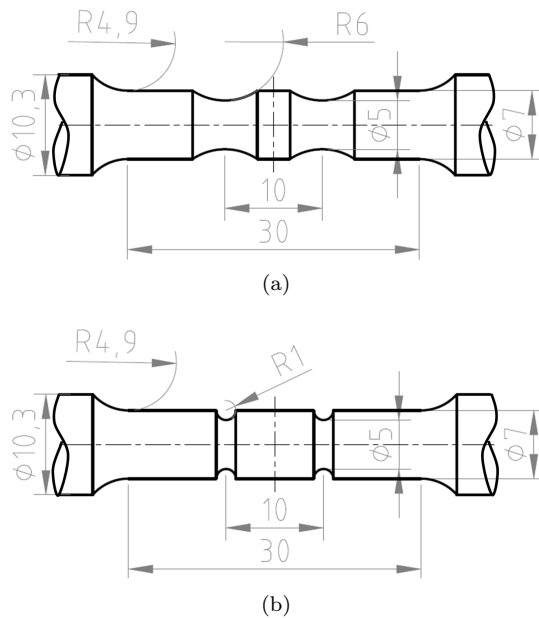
Specimen geometry: a) NT6 and b) NT1. All dimensions are in mm.
